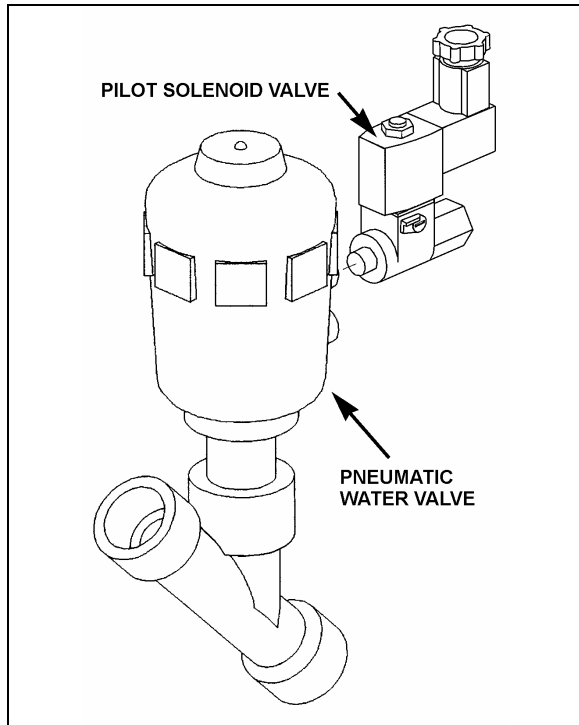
DRIVER'S HOT WATER PNEUMATIC VALVE ASSEMBLY
